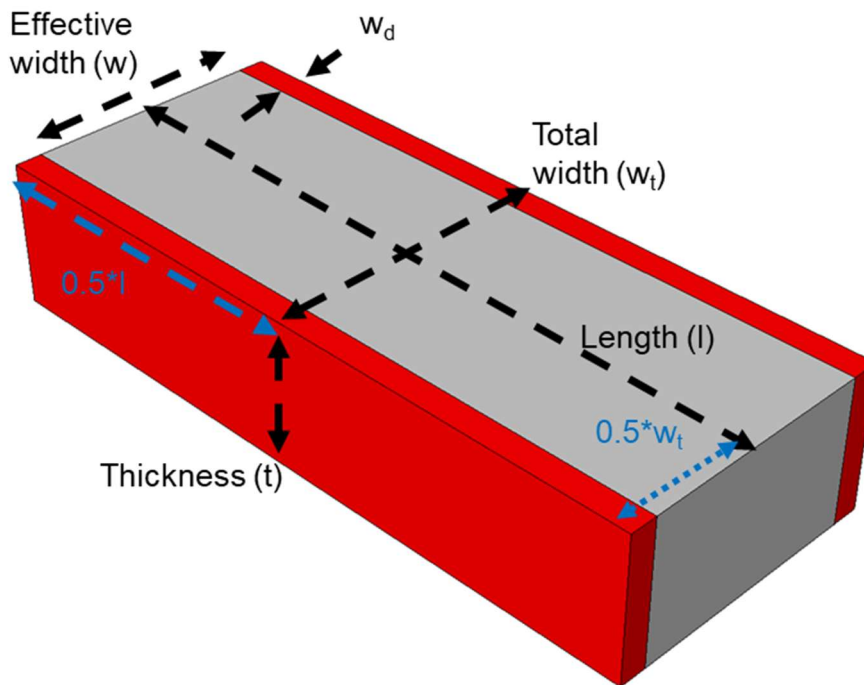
Dimensions of the composite specimens cut using a waterjet
